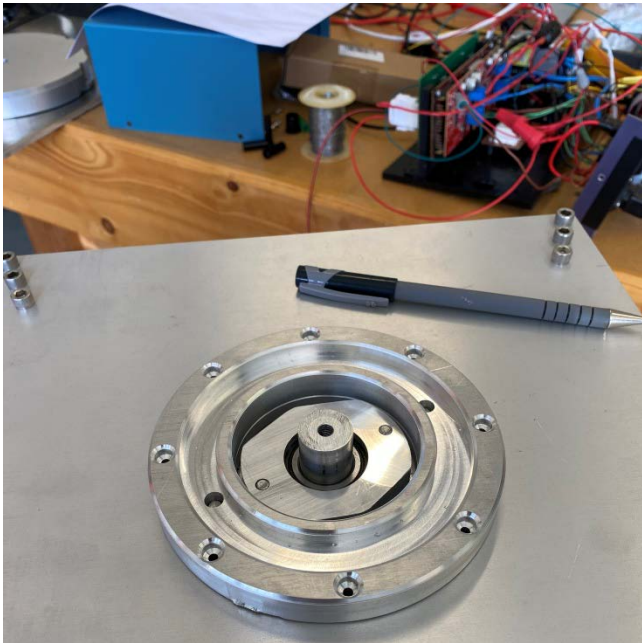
Azimuth plate top-side thrust bearing housing. The new thrust bearing reside is the large groove.
